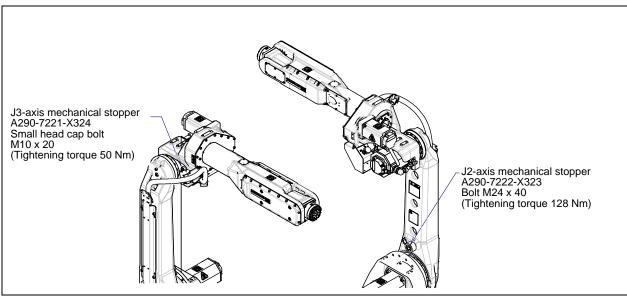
Check of mechanical stopper and adjustable mechanical stopper
